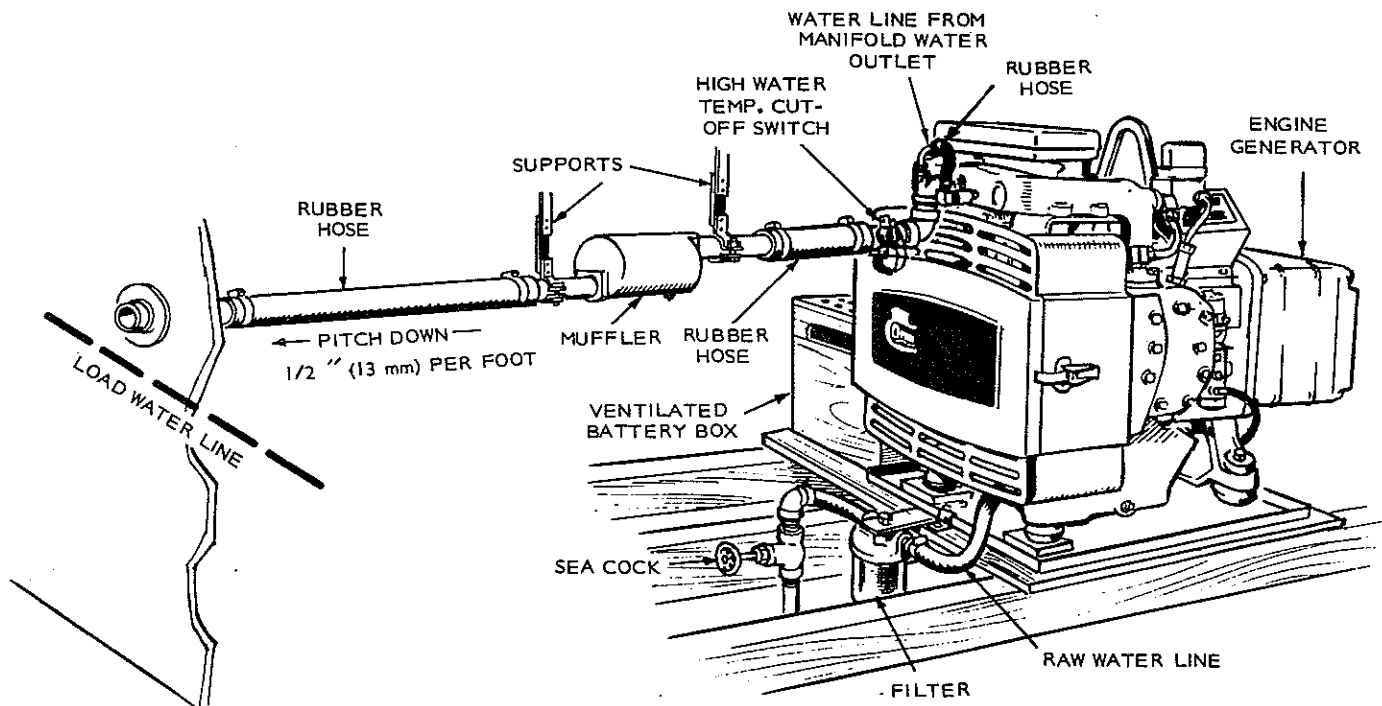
TYPICAL MCCK DIRECT COOLING INSTALLATION
